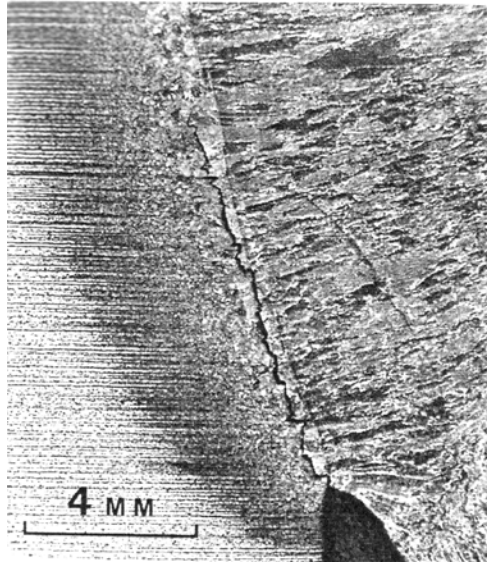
5 A micrograph showing root HAZ cracks in a multi-pass weld of 100 mm boiler steel, welded using a low hydrogen welding consumable with a single bevel preparation (after Suzuki and Yurioka 1982).
